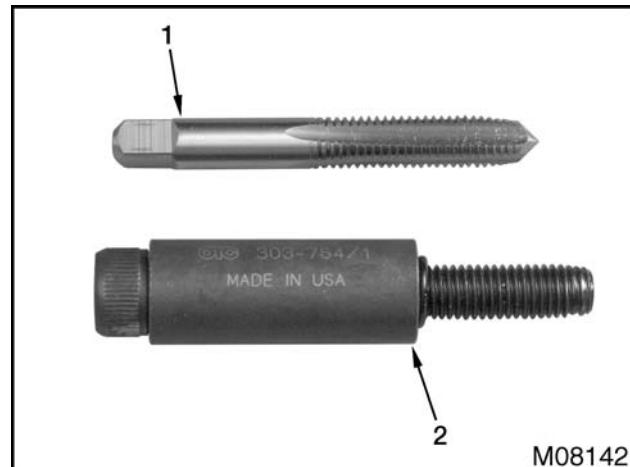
Glow Plug Sleeve Remover ZTSE4531
